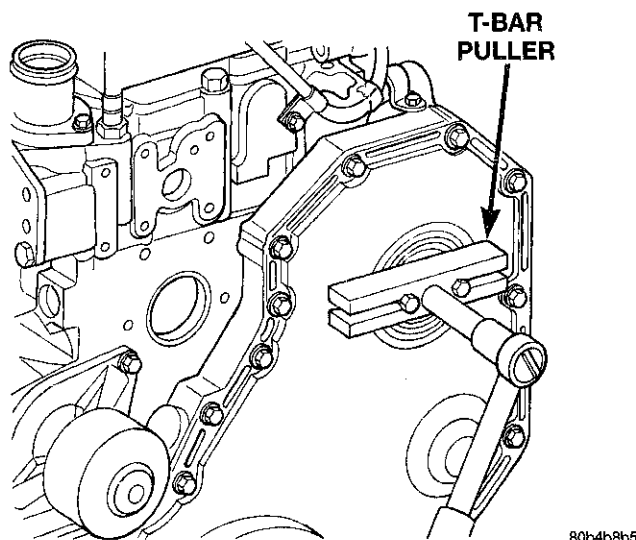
Separating Injection Pump Gear from Pump Shaft
